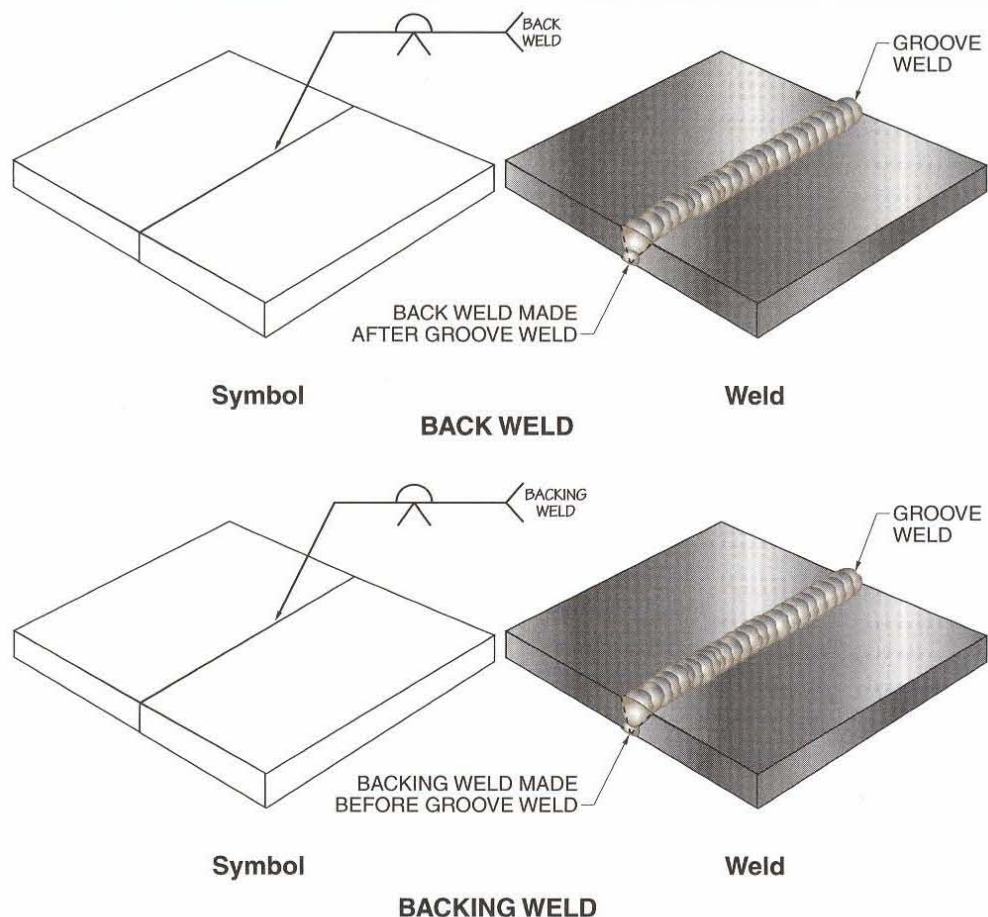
The back or backing weld symbol is included opposite the weld symbol, with a note included in the reference tail.
